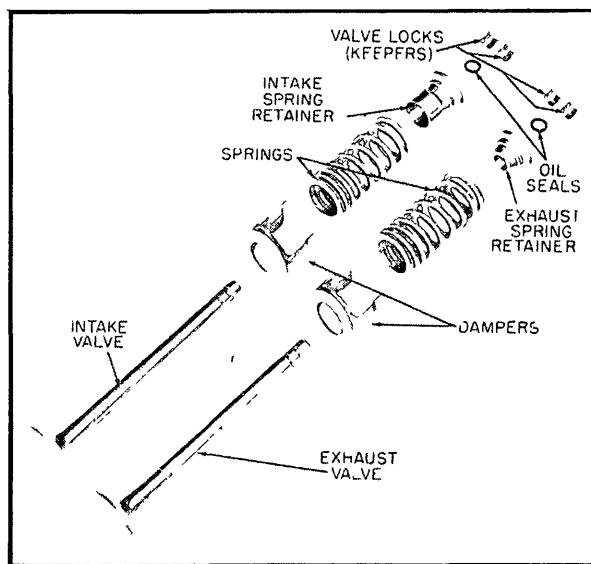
Layout of valves and related parts, 1951-52 V8 engine
